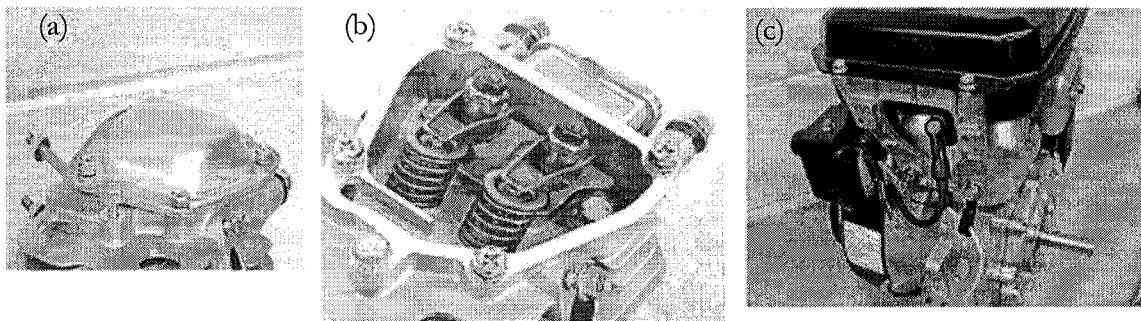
(a) The Valve Cover, (b) the Rocker Arm Assembly, (c) the Engine Assembly
